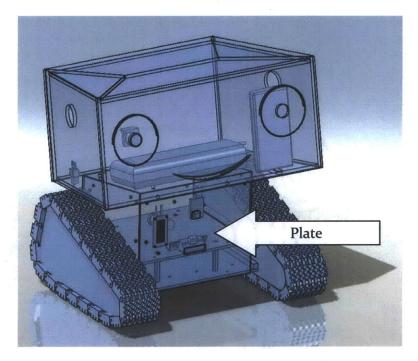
SolidWorks drawing of plate, later converted into a 2D rendering.
